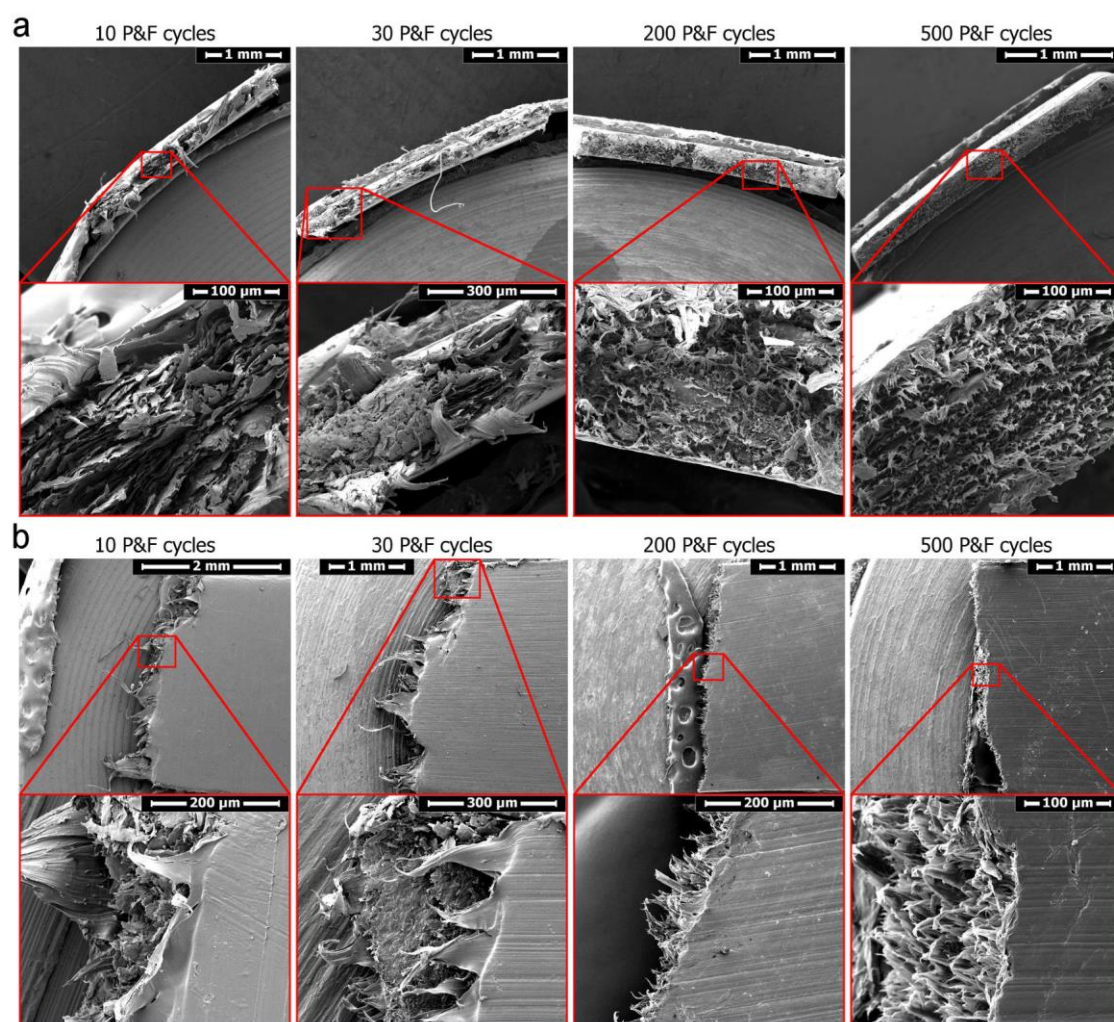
Tensile fracture surfaces of LLDPE + 4.8 vol.% GNP nanocomposites with increasing GNP dispersions. (a) Front view; (b) side view.
